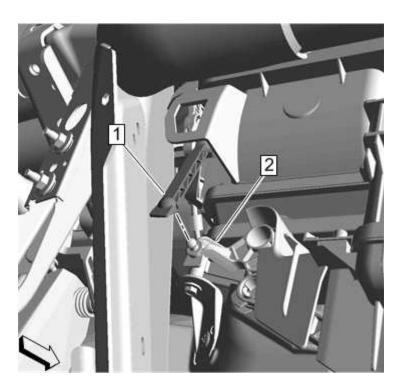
Vent Valve Link And Floor Air Valve Lever Courtesy of GENERAL MOTORS COMPANY
